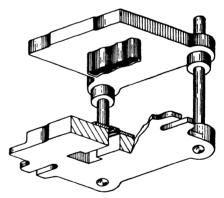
Push-through trimming die. This type is usually the most economical to build and is used for small castings that have their largest dimensions on the parting line.
